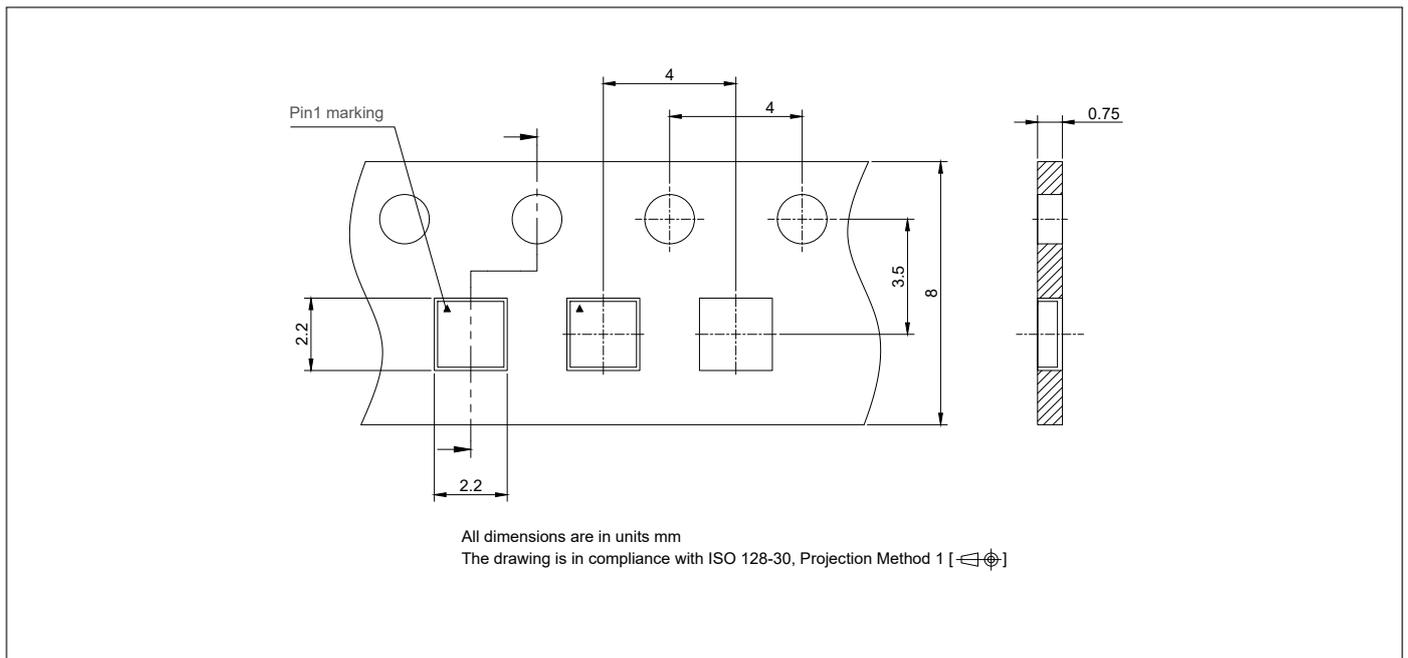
PG-ULGA-16-6 carrier tape drawing (top and side views)
